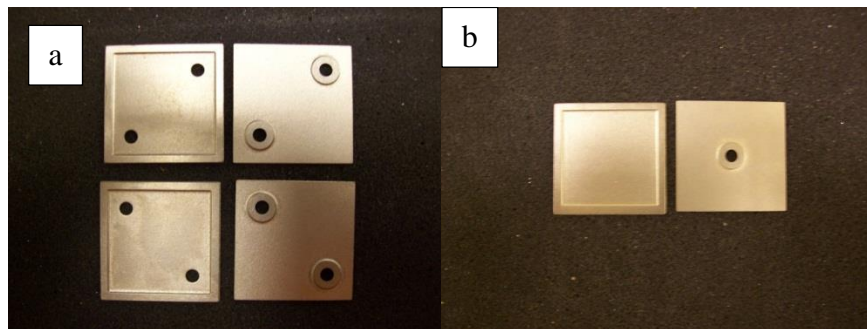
MPTN pressure drop and laser welding test coupons. (a) Two sets of unassembled laminae used to evaluate the pressure drop across a single MPTN, and (b) One set of laminae used to evaluate the hermeticity of laser welds produced using magnetic workholding.
